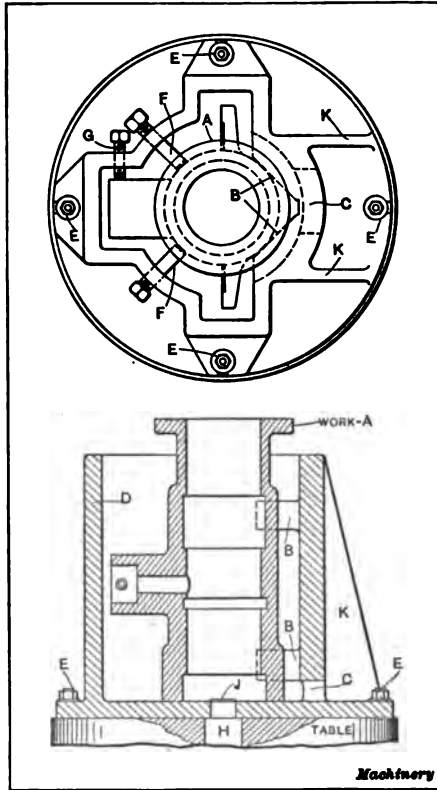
Pot Casting Fixture for Holding Irregular Steel Castings on Vertical Turret Lathe
